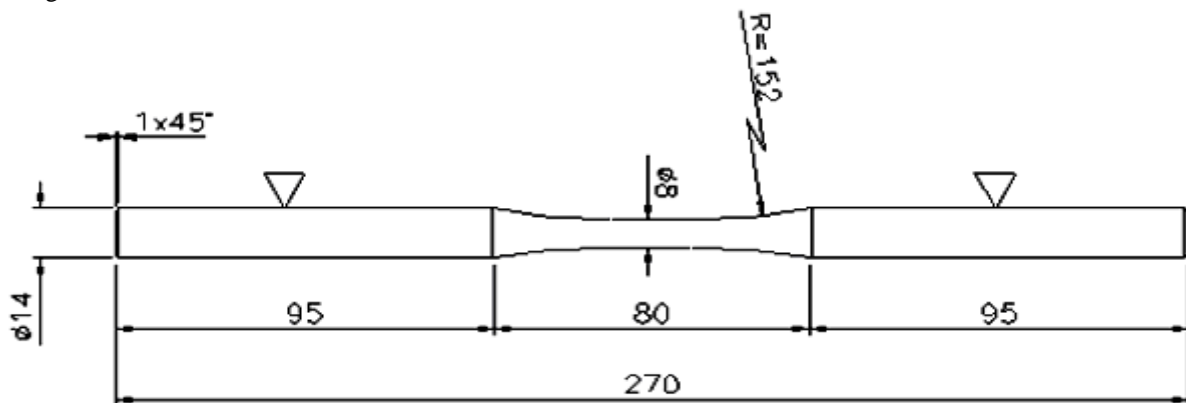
Geometry of the specimens used in rotating-bending fatigue testing – Dimensions in mm
